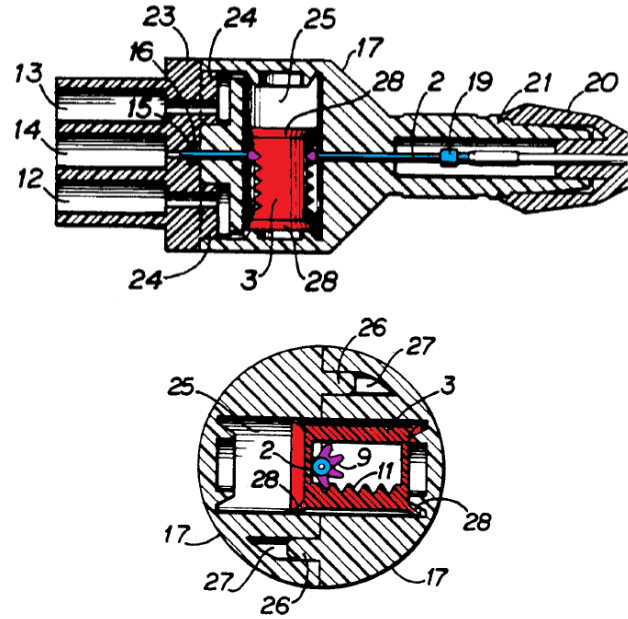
Schematic representation of the piston and pinion gear mechanism. Components: 2 = inner cutting tube, 3 = piston with internal gear rack, 9 = pinion gear, 11 = internal gear rack, 12,13 = connection to air pressure source, 14 = connection to vacuum source, 25 = air chamber. Adapted from: [57]
